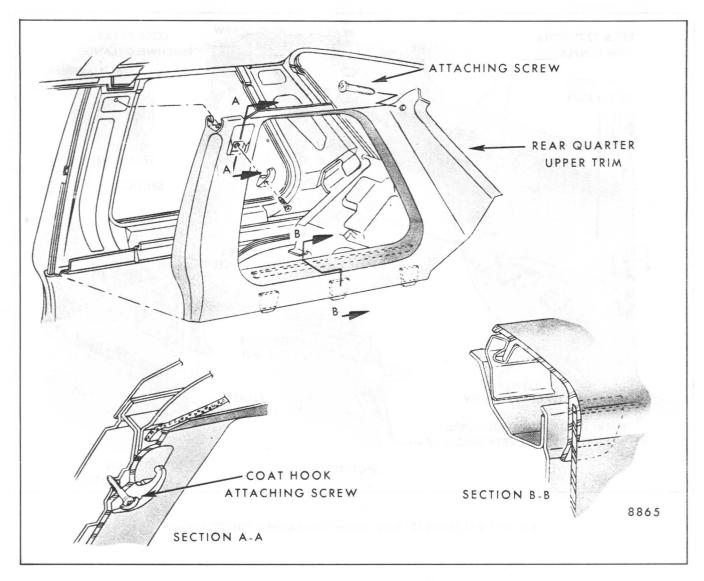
Quarter Upper Trim Attachment - "H-27 and A-57" Styles
